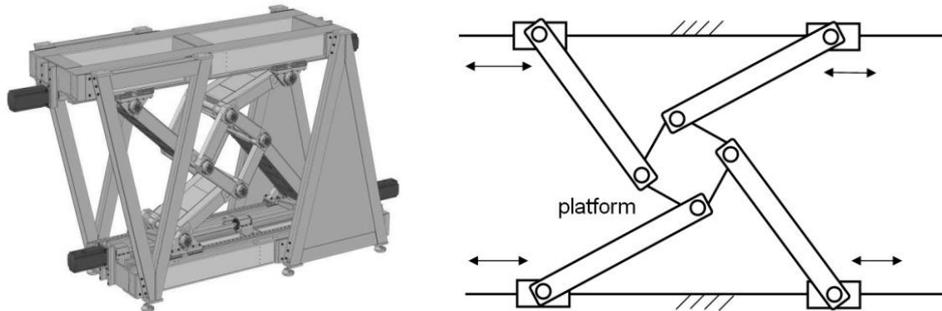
a) redundantly actuated PKM machine Sliding Star b) kinematic scheme
